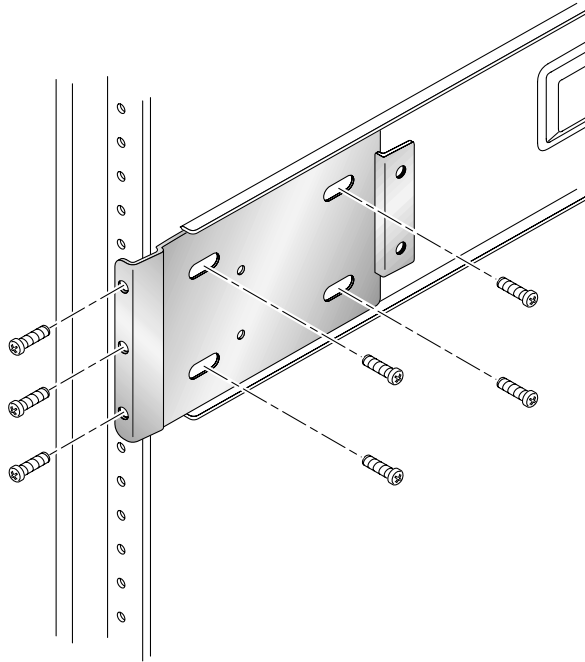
Mounting the Rear Expansion Bracket of the Side Rail
